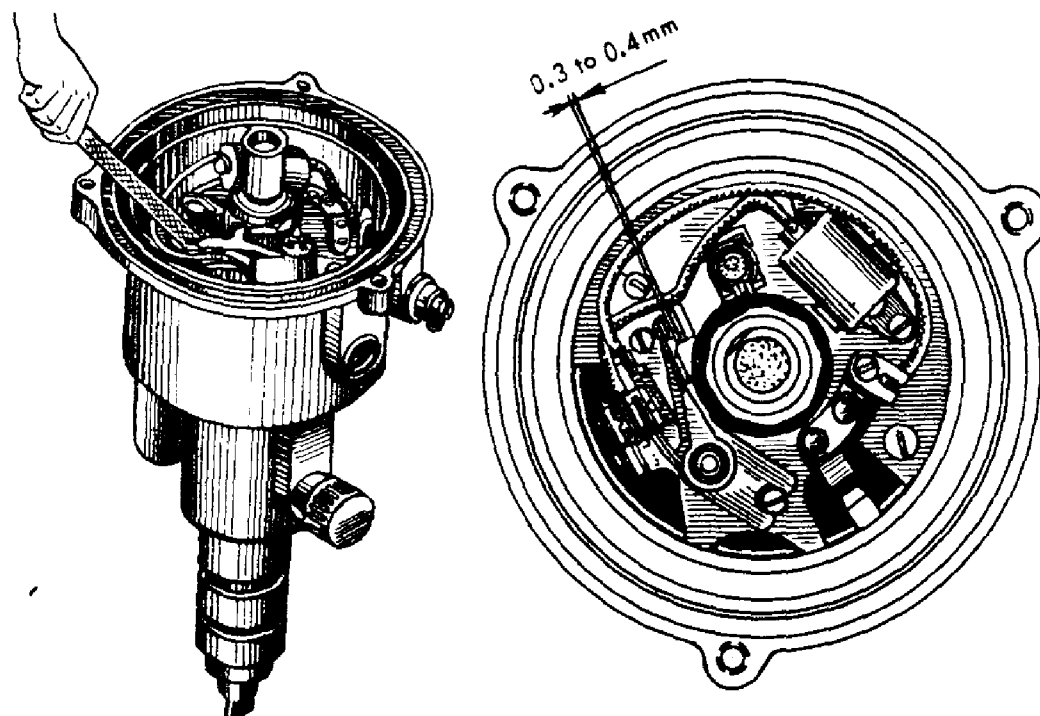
METHOD OF CLEANING CONTACT POINTS AND ADJUSTING CONTACT-BRAKER CLEARANCE
